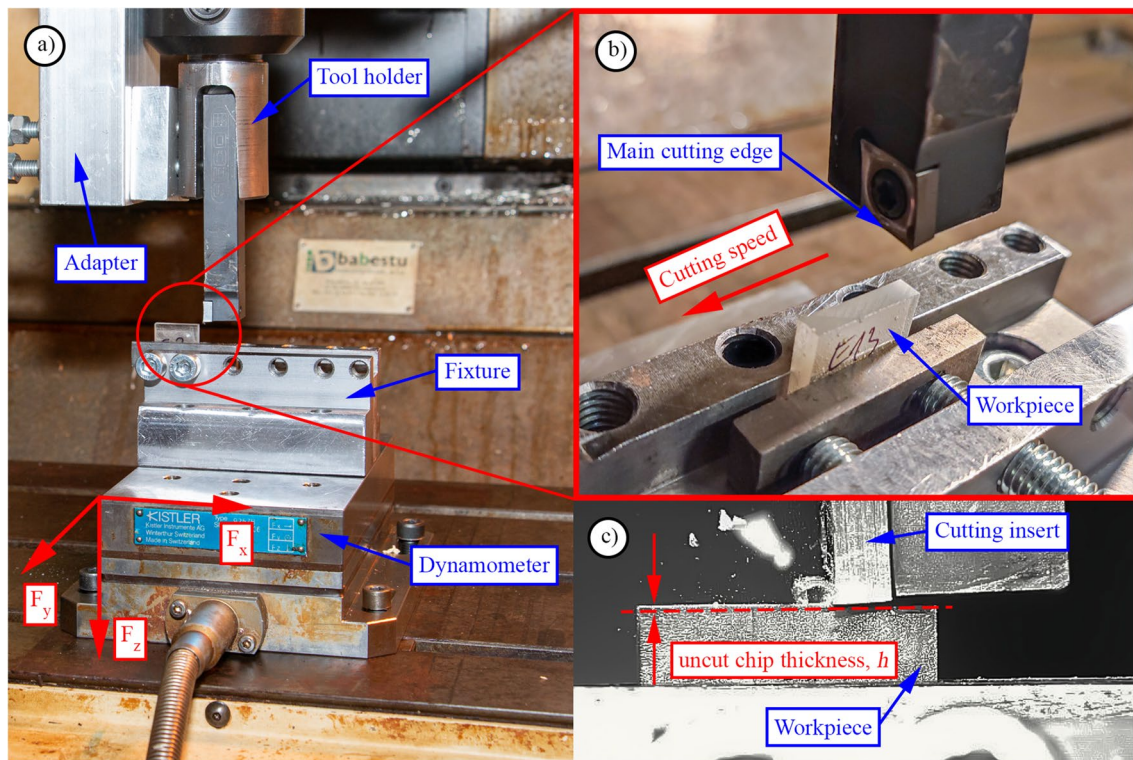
Orthogonal machining experimental setup: (a) fixturing of the cutting tool and workpiece, (b) the relative position of the main cutting edge to the workpiece (orthogonal setup), (c) the interpretation of uncut chip thickness (h) during orthogonal machining
